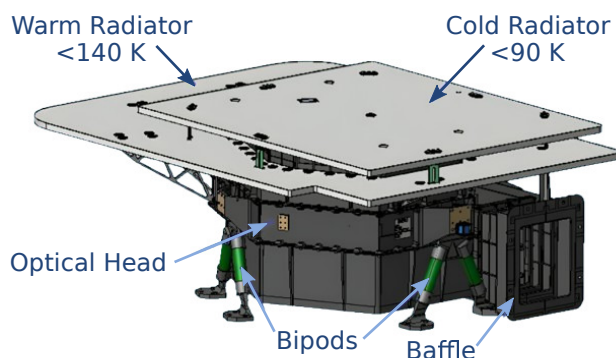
Mechanical drawing of MAJIS (extracted from [79]).
